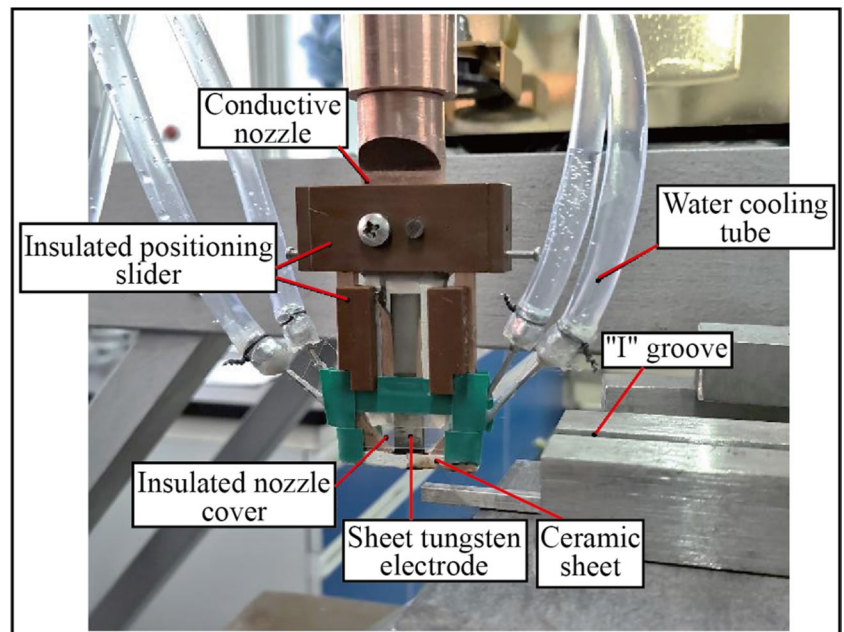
Physical drawing of sheet tungsten electrode welding torch [40]
